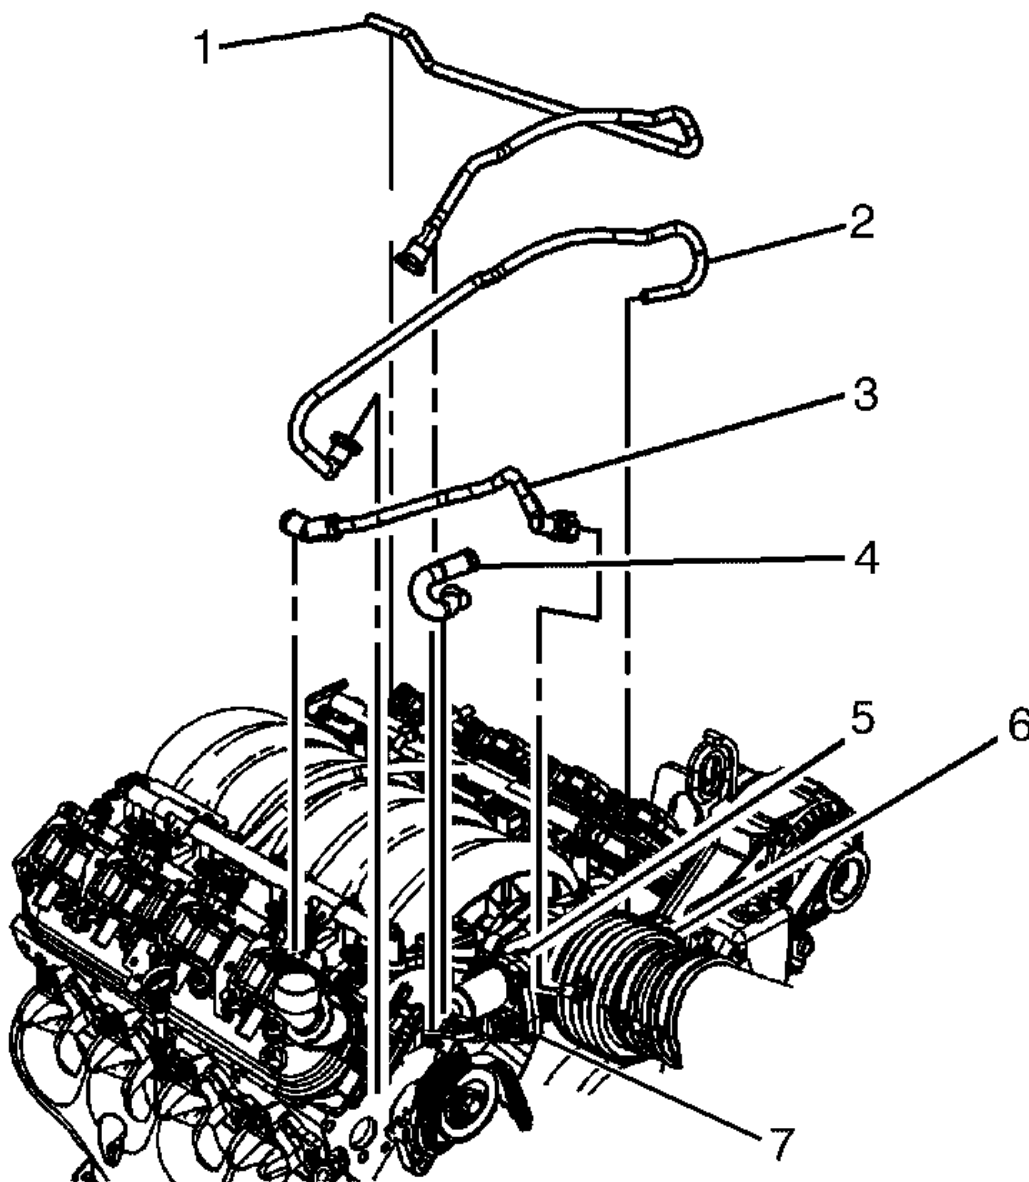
View Of EVAP Pipes, Emission Canister Purge Valve, Air Intake Duct & Throttle Body
